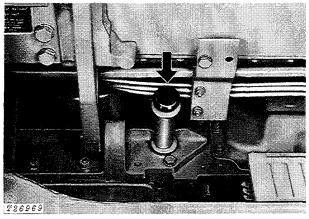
Transmission-Hydraulic System Filler Cap and Dipstick
